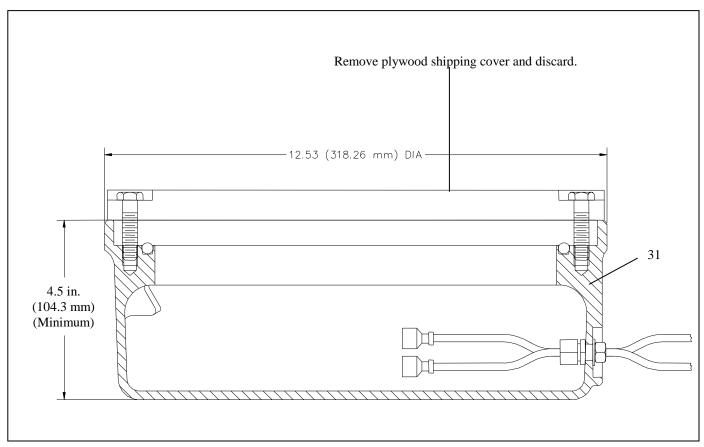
F-Range Light Fixture (Part 3 of 3)
